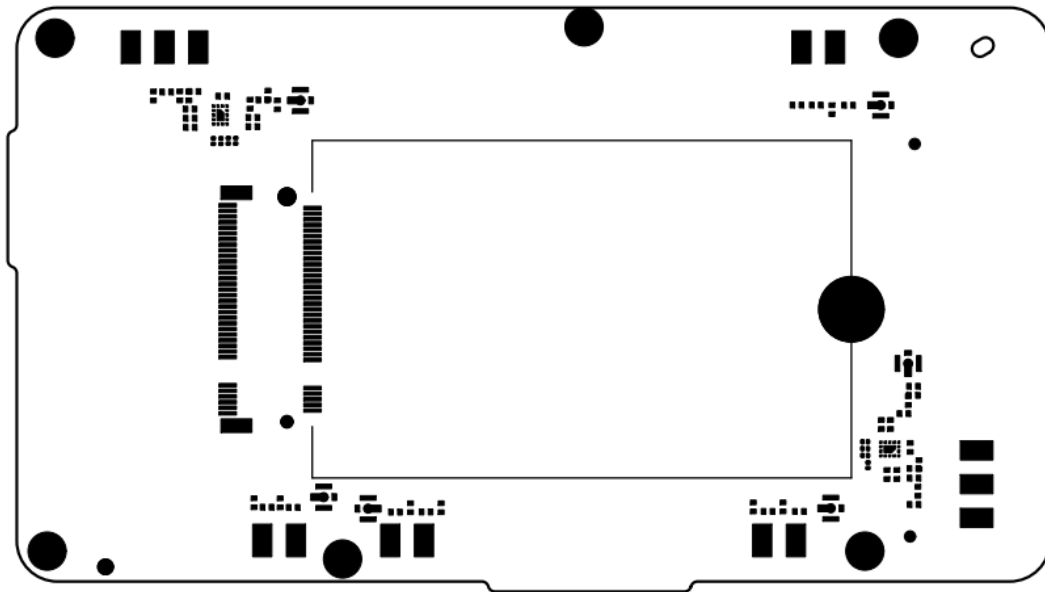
5G S-Module All-in-one Type-M Pin Layout top view
